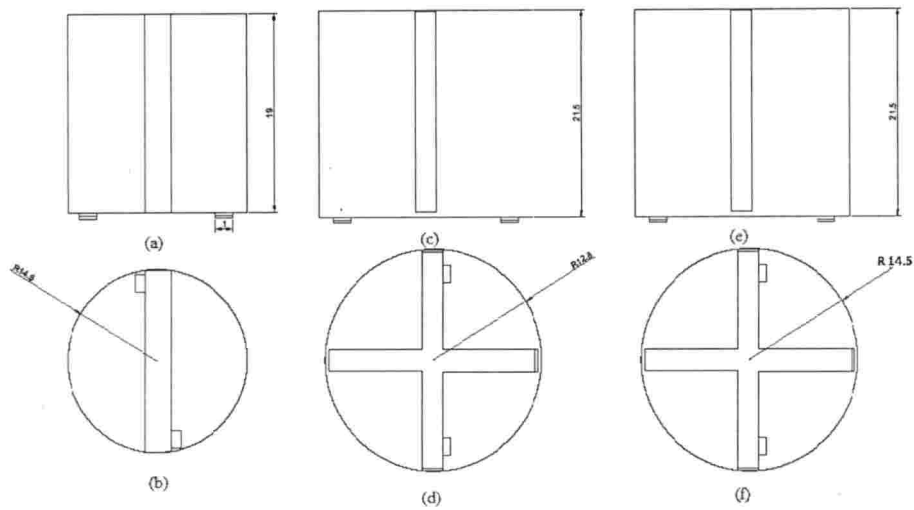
Elevation (a) and plan (b) of small bag holder, elevation (c) and plan (d) of medium bag holder and elevation (e) and plan (f) of large bag holder
